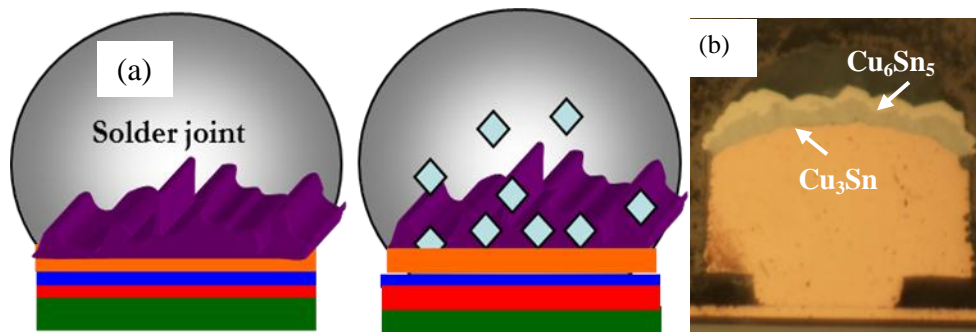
Standard cross-sectioning (90°) of microbump solder joint.
